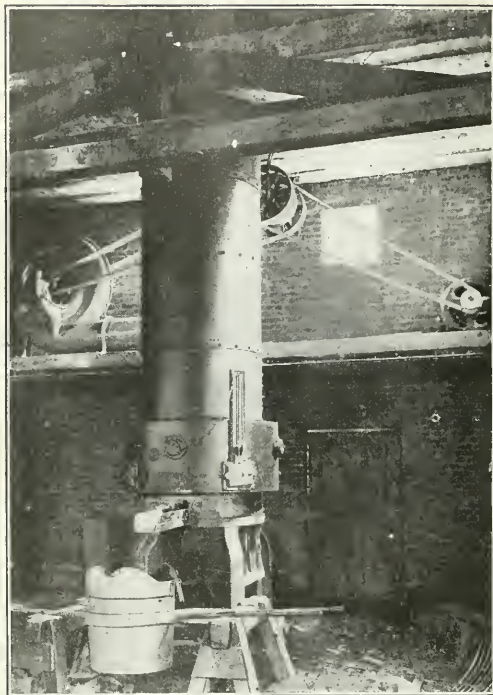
VIEW OF CUPOLA AND MOTOR FURNISHING BLAST
